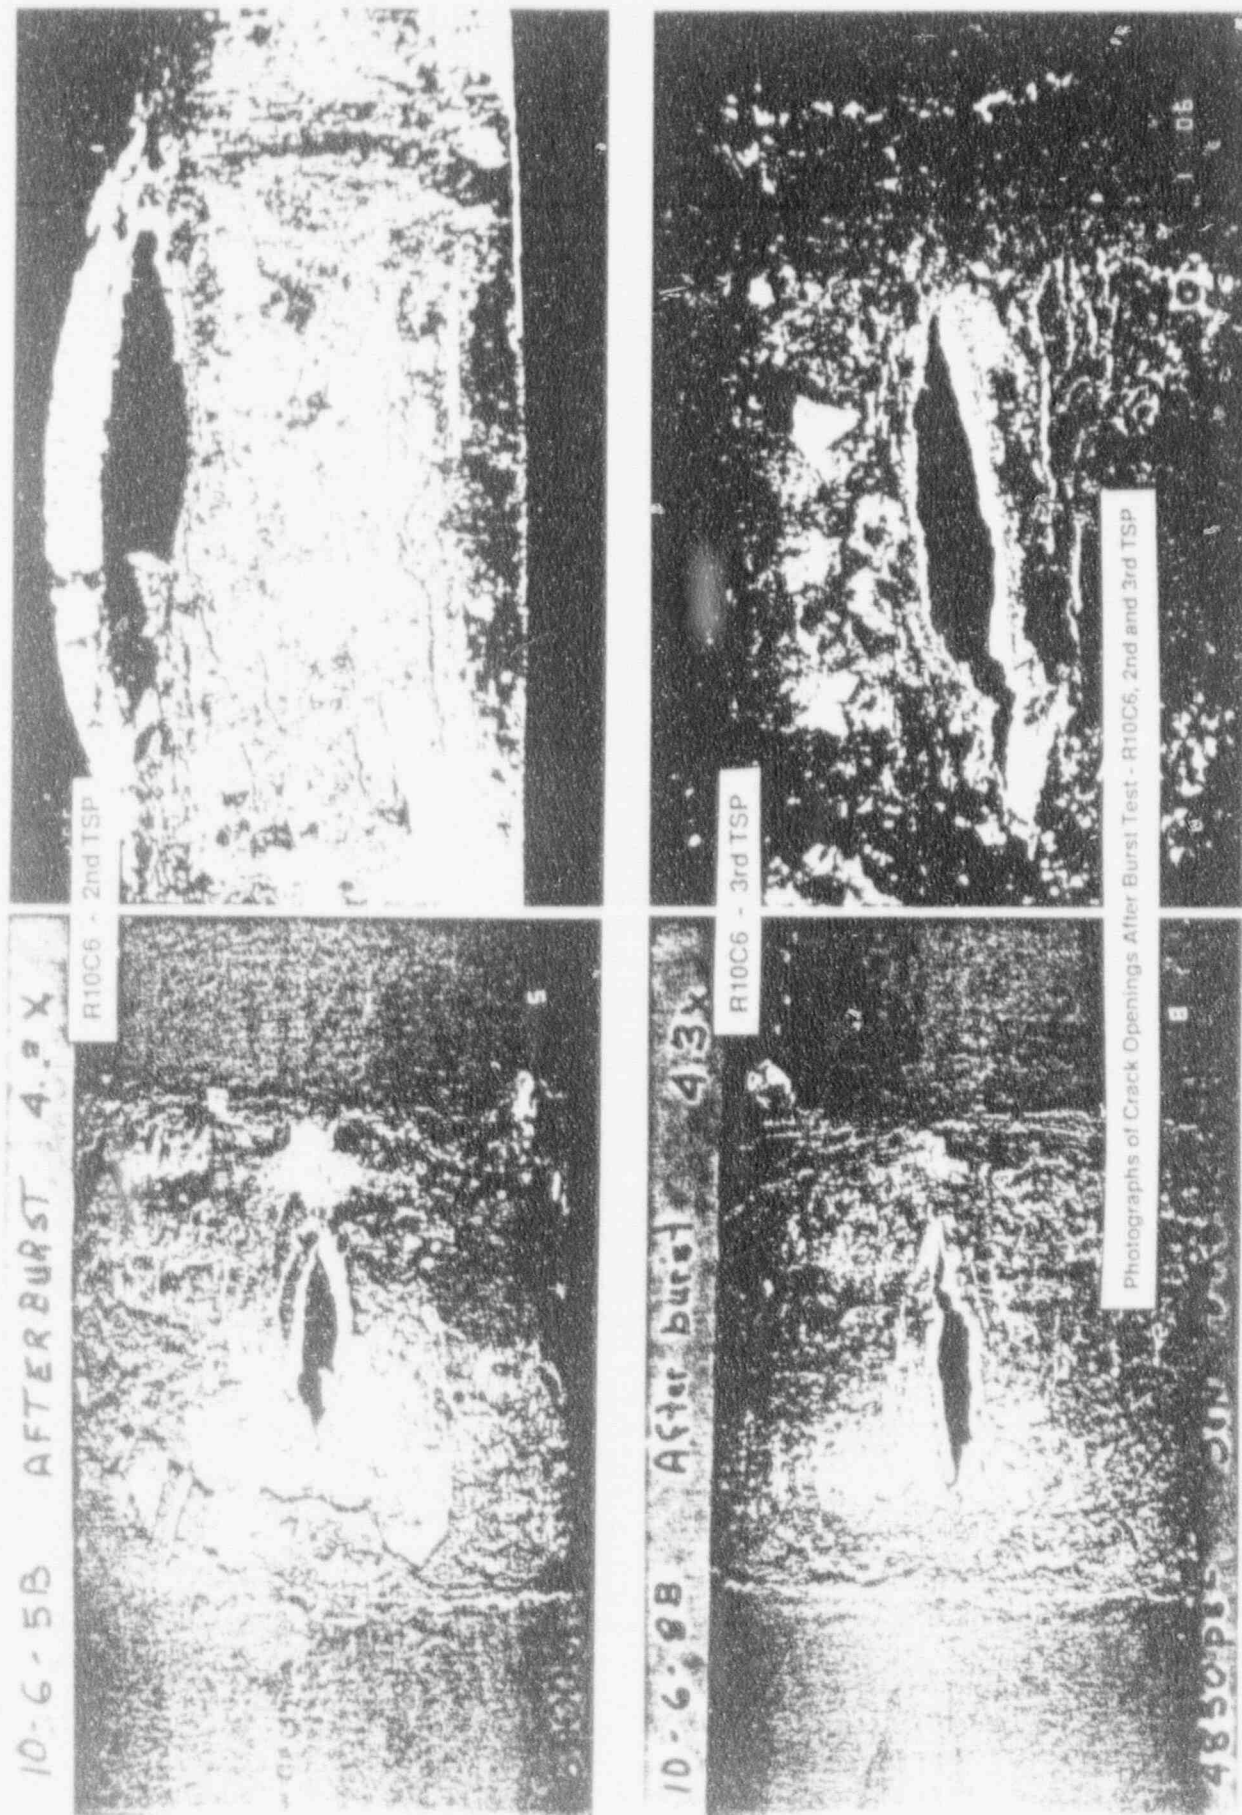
Catawba-1 Pulled Tube R10C6, TSP-2 and 3: Crack Opening After Burst Test
